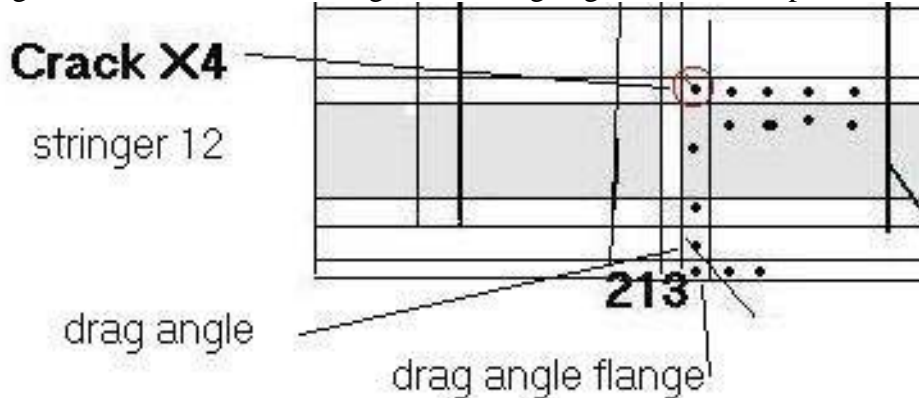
Crack is in the flange of the drag angle not the skin panel
